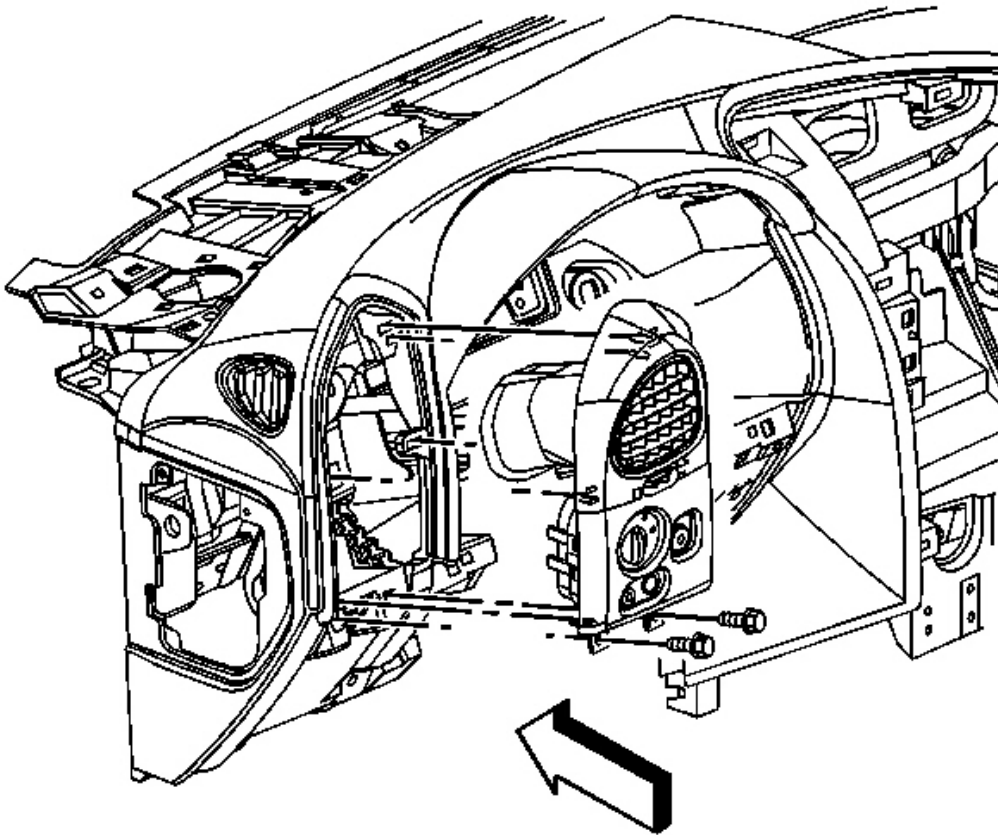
View Of Knee Bolster Trim Panel & Bolts
